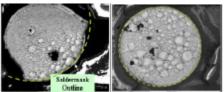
Top views of microvoids located in a plane at the PCB land surface after SMT assembly and solder ball removal. Partially MD-metal-defined (L) and SMD-solder mask defined (R) PCB lands. Microvoids tend to appear more frequently near soldermask edges.
